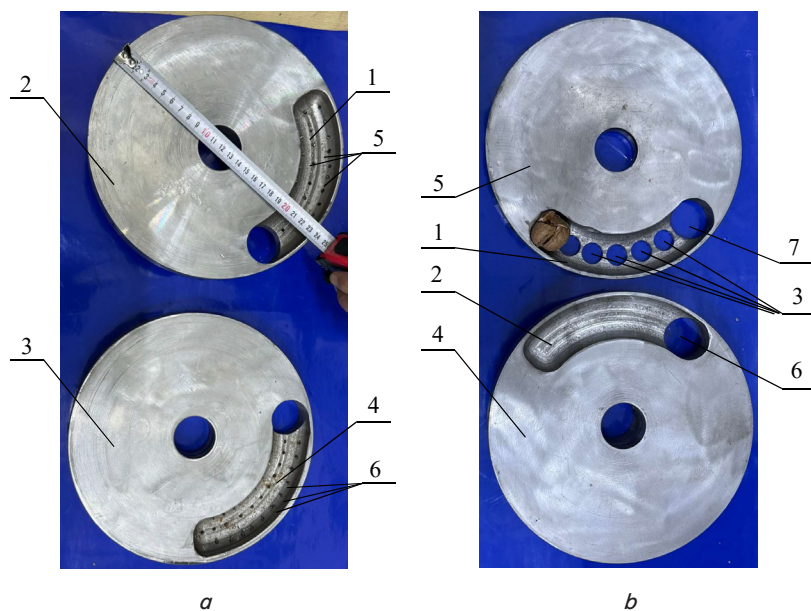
Movable and fixed millstones of the first and second sections: *a* – millstones of the first section: 1 – groove of the movable upper millstone of the first section; 2 – upper movable millstone; 3 – lower fixed millstone of the first section; 4 – groove of the fixed lower millstone of the first section; 5 – roughness in the grooves of the upper millstone; 6 – roughness in the grooves of the lower millstone; *b* – millstones of the second section: 1 – groove of the lower millstone of the second section; 2 – groove of the upper millstone of the second section; 3 – hole for suction of walnut shells; 4 – upper movable millstone of the second section; 5 – lower fixed millstone of the second section; 6 – through hole of the upper millstone of the second section; 7 – through hole for the walnut kernel to come out
